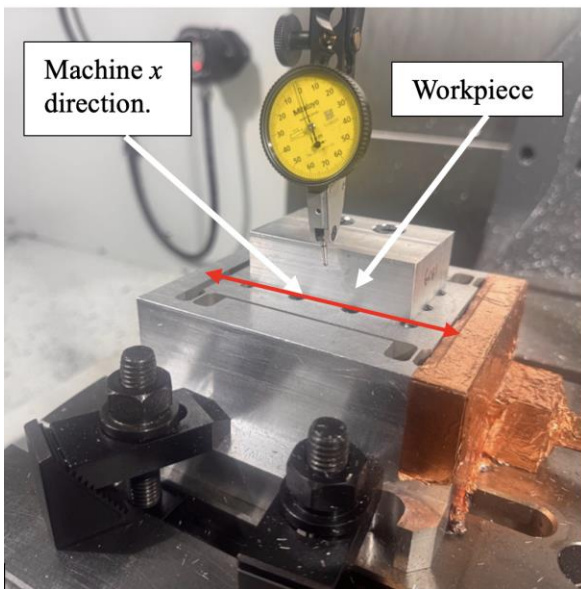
CMD workpiece alignment to the machine x axis with stainless steel plate.
